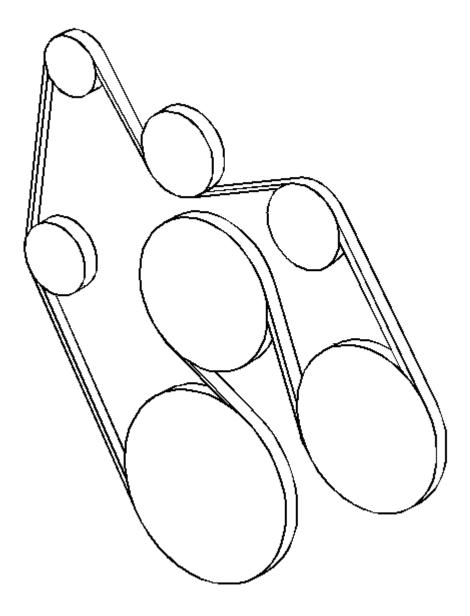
View Of Drive Belt Routing (W/Air Conditioning) Courtesy of GENERAL MOTORS CORP.
